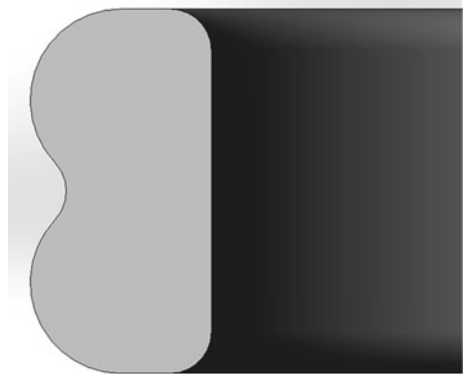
shows a schematic drawing of the cross section of the ring. It is a double row ring, with rounded edges on the external surface. The internal surface is cylindrical with slightly rounded edges.
